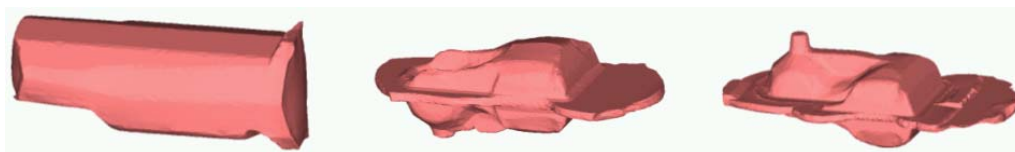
Intermediate shapes of forgings (version I of preform); from left hand side: extension forging, blocker forging, and finisher forging
